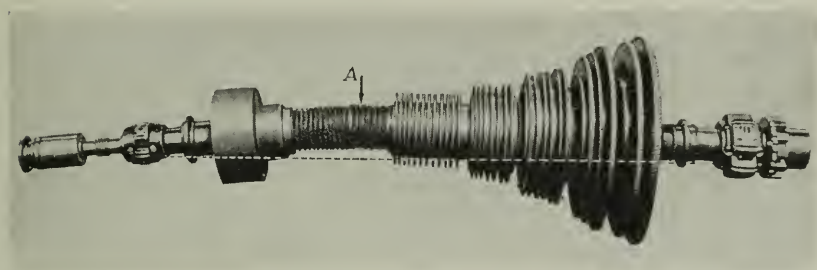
The photograph was purposely distorted to make clear how the shaft was bent and just where heat was applied. The distortion of the shaft is, of course, absurdly exaggerated.
